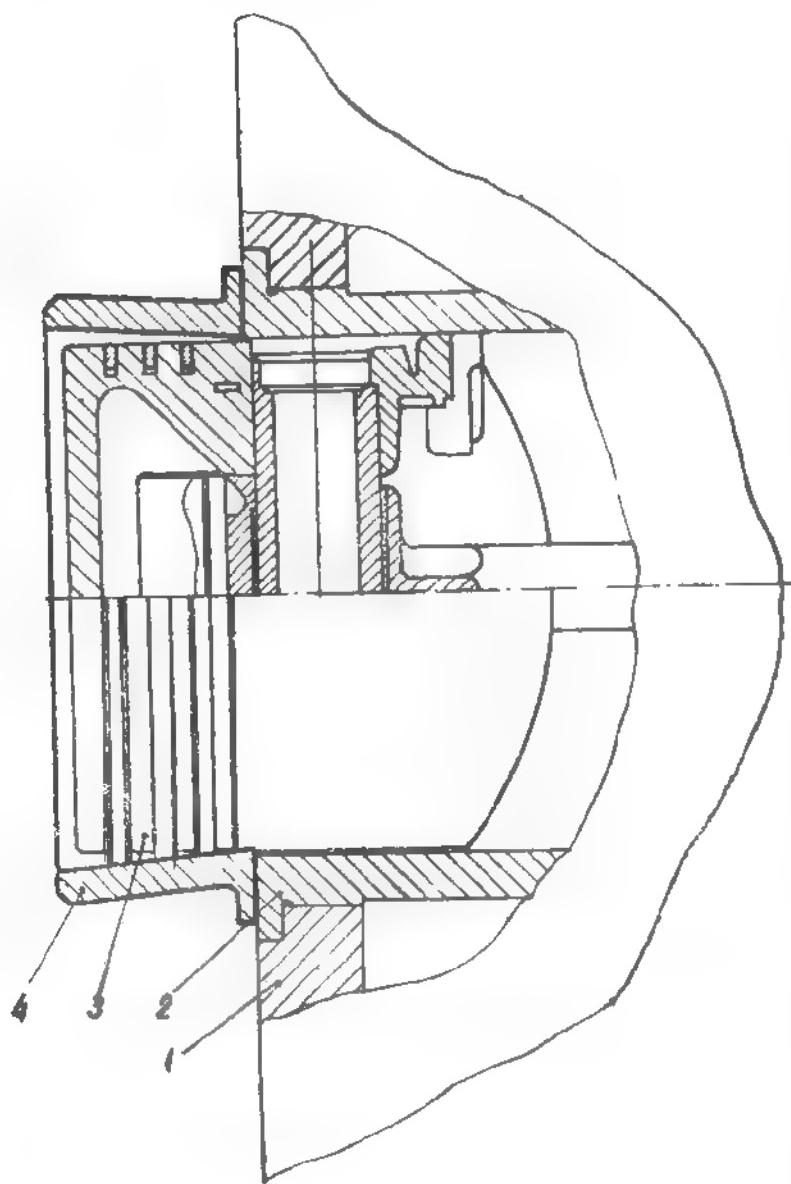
FITTING PISTON & PISTON ROD ASSEMBLY IN CYLINDER BLOCK BY MEANS OF S-17 ASSEMBLING SLEEVE:
